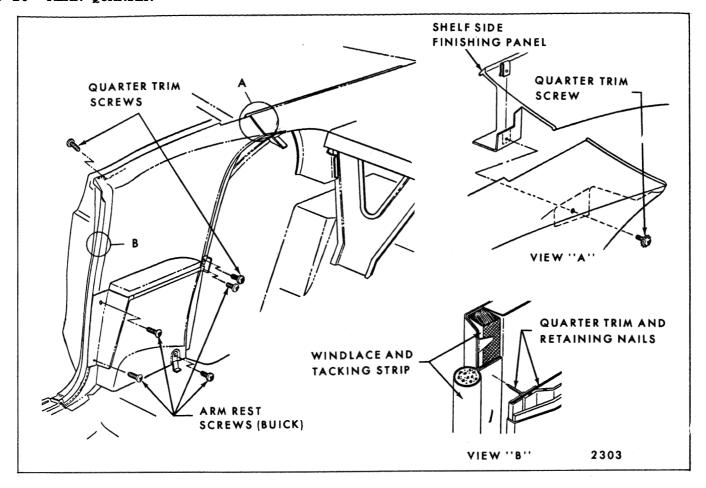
Rear Quarter Arm Rest and Trim Assembly - "E" Body
